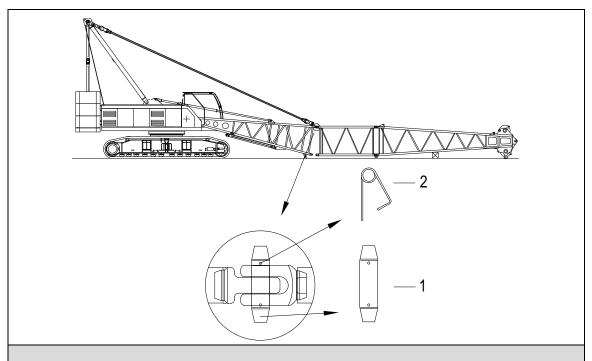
Bolt preassembled main boom sections to main boom pivot section
